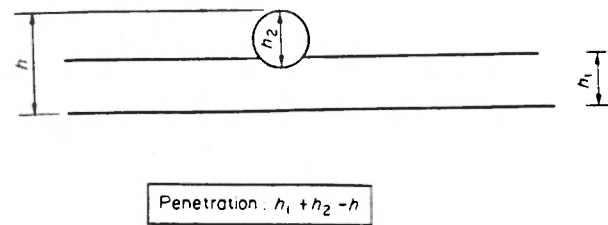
Measurement of the penetration in cruciform welds
